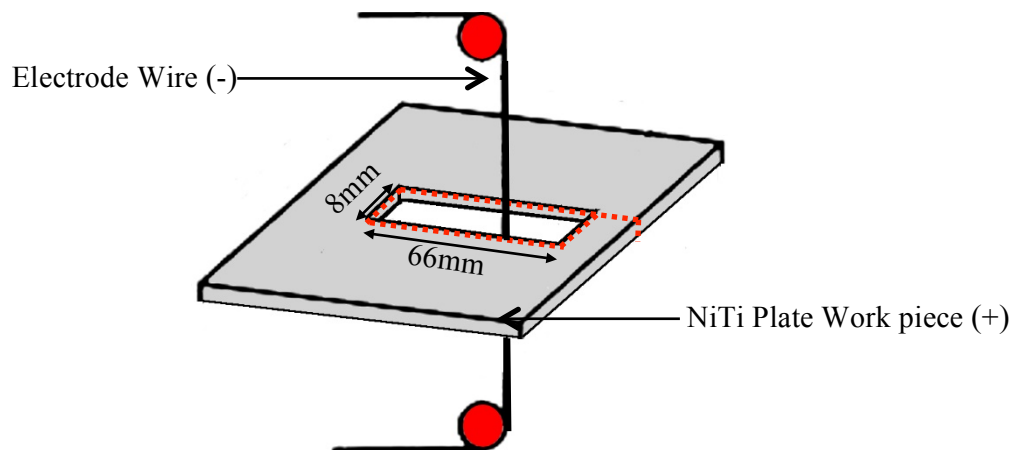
Wire Cut EDM process employed for machining NiTi specimens
